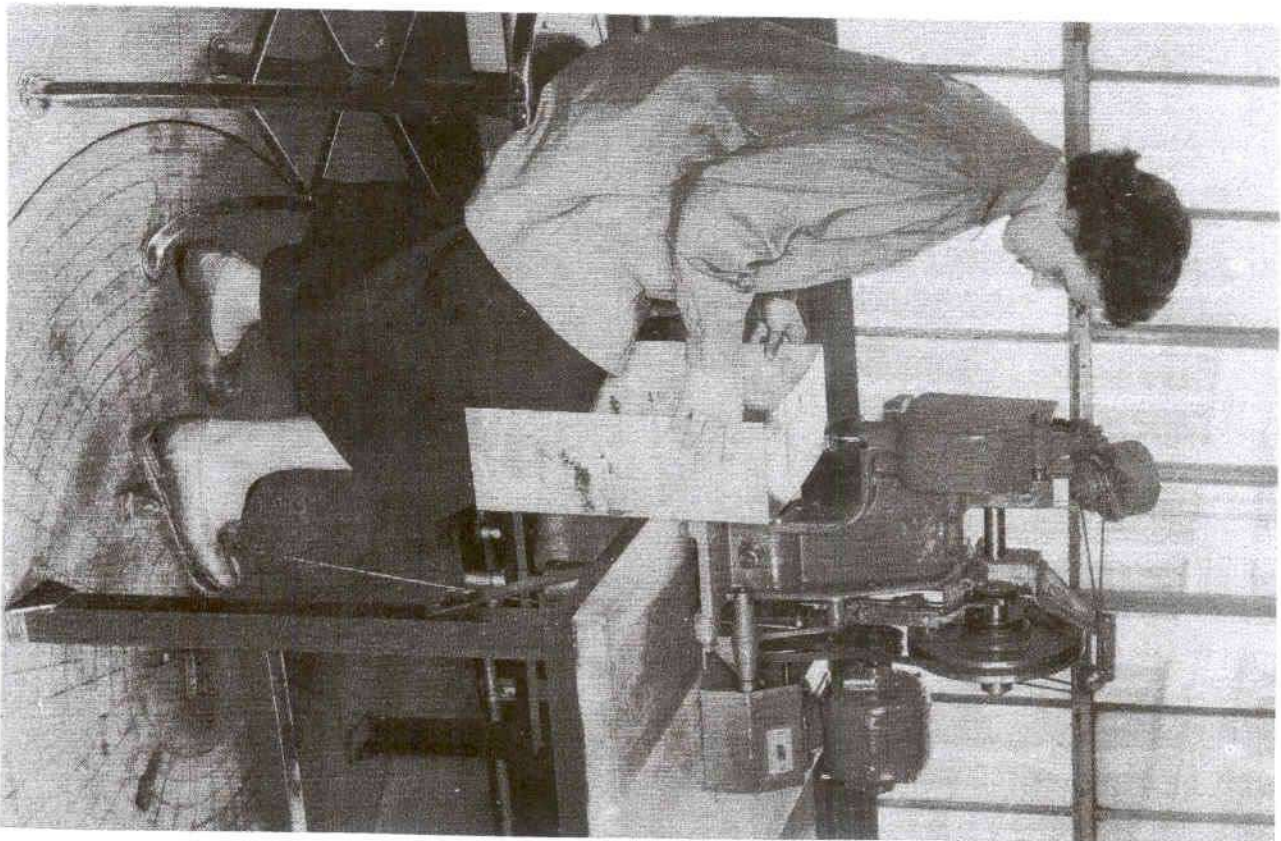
View of Machine With Operator - Horn Extending Over Edge Of Bench
